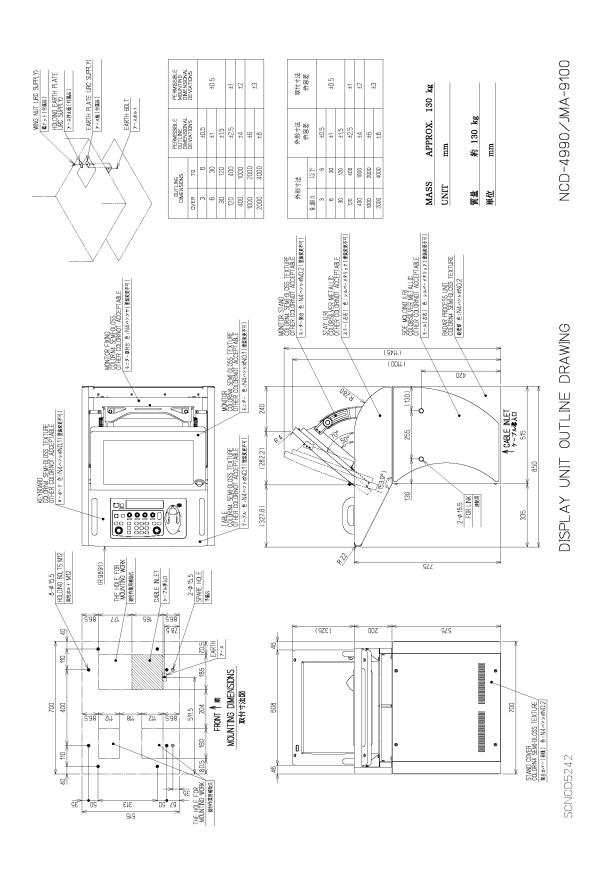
Outline Drawing of Display Unit, Type NCD-4990
